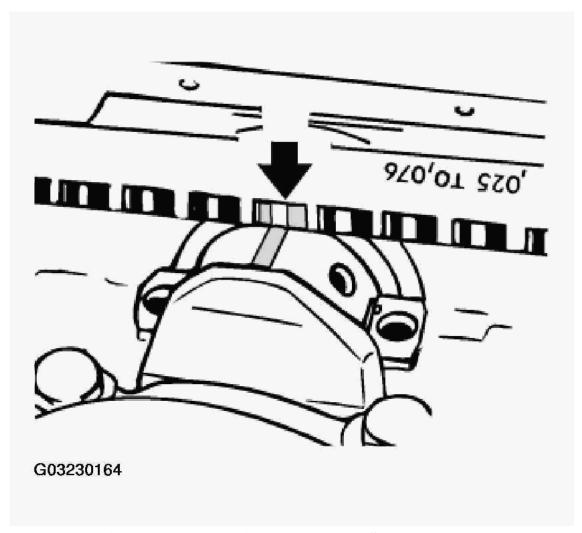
Reading Bearing Play Using Measurement Scale Courtesy of BMW OF NORTH AMERICA, INC.
